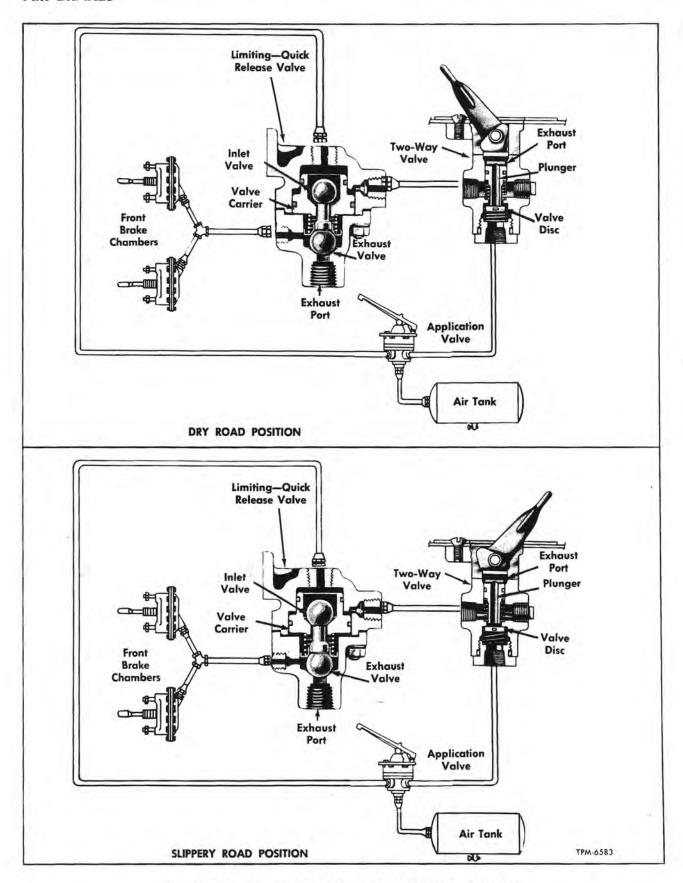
Front Brake Limiting and Two-Way Control Valve Operation
